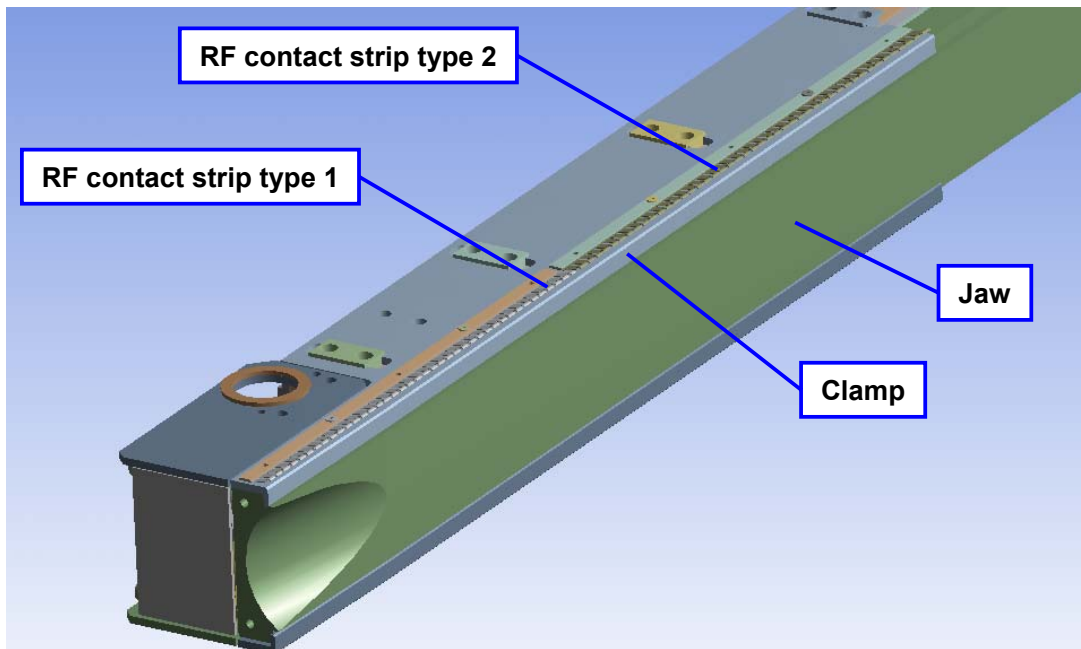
Mounting scheme of RF contact strips on a TCSG jaw (1 clamp shown)
